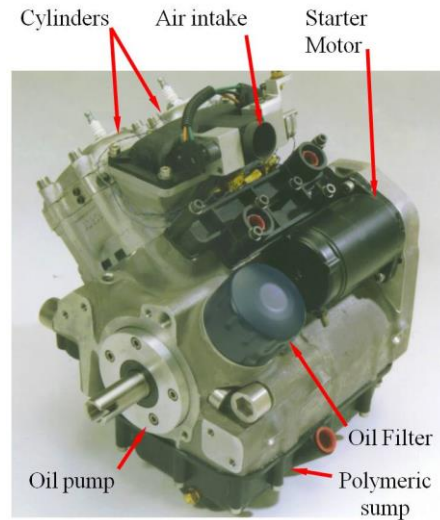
Stepped piston 290 cm<sup>3</sup> 180° parallel twin cylinder engine
